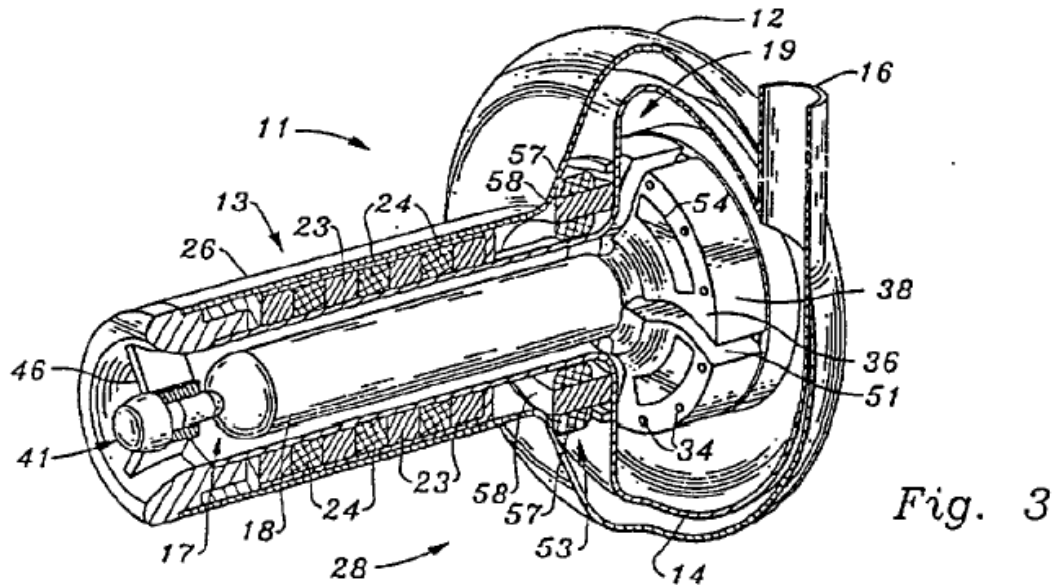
depicts pump 11 including housing 12 with elongated inlet tube 13 and discharge tube 16. *Id.* ¶ 50. Casing 14 encloses rotor 17, which includes spindle 18 and attached impeller 19. *Id.* ¶ 51. Forward magnetic bearing 21 and rearward magnetic bearing 22 “levitate rotor 17 and maintain it in proper radial alignment with respect to its longitudinal axis.” *Id.* ¶ 52; *see also id.* ¶ 54 (explaining that “magnetic polarizations and repulsive forces produced by the magnets and the pole pieces of forward magnetic bearing 21 are such that magnetic levitation of support shaft 18 results”). Motor 53 includes arcuate magnetic segments 54 embedded in upper face portion 36 of impeller 19. *Id.* ¶ 70. Magnetic segments 54 have alternating polarity orientations and are directed toward motor stator 56 mounted on the outer surface of impeller casing 14. *Id.* Motor stator 56 includes pole piece 58 and windings 57, which are energized to generate an electromagnetic field that drives magnets 54 to rotate impeller 19 of rotor 17. *Id.* ¶¶ 70, 72. According to Wampler, “[m]otor 53, with windings 57 and pole piece 58, together with magnets 54, function not only
